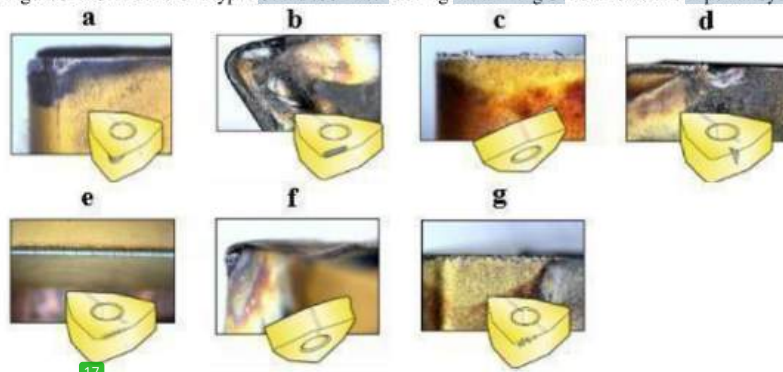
Types of wear (a) Flank wear (b) Crater wear (c) Built-up edge (d) Notching/Notch wear (e) Thermal cracks (f) Plastic deformation (g) Chipping [62]
